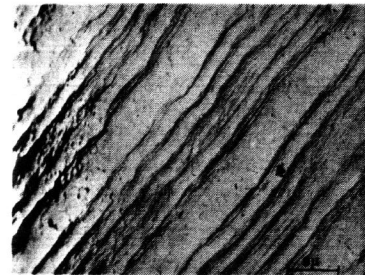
FATIGUE FRACTURE - The applied spectrum loads shown in Figure 26 produced this fracture topography.
